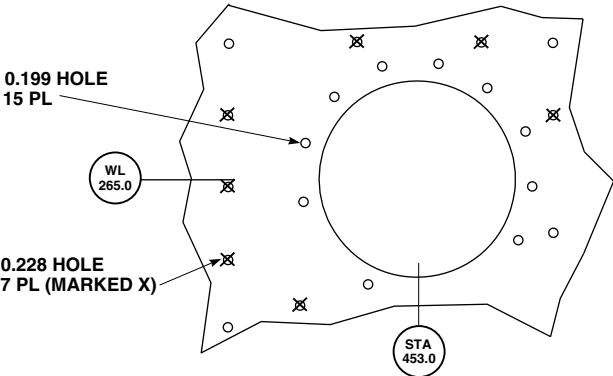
INSTALL APU ENGINE AIR PARTICLE SEPARATOR (EAPS) KIT (SHEET 1 OF 8)
